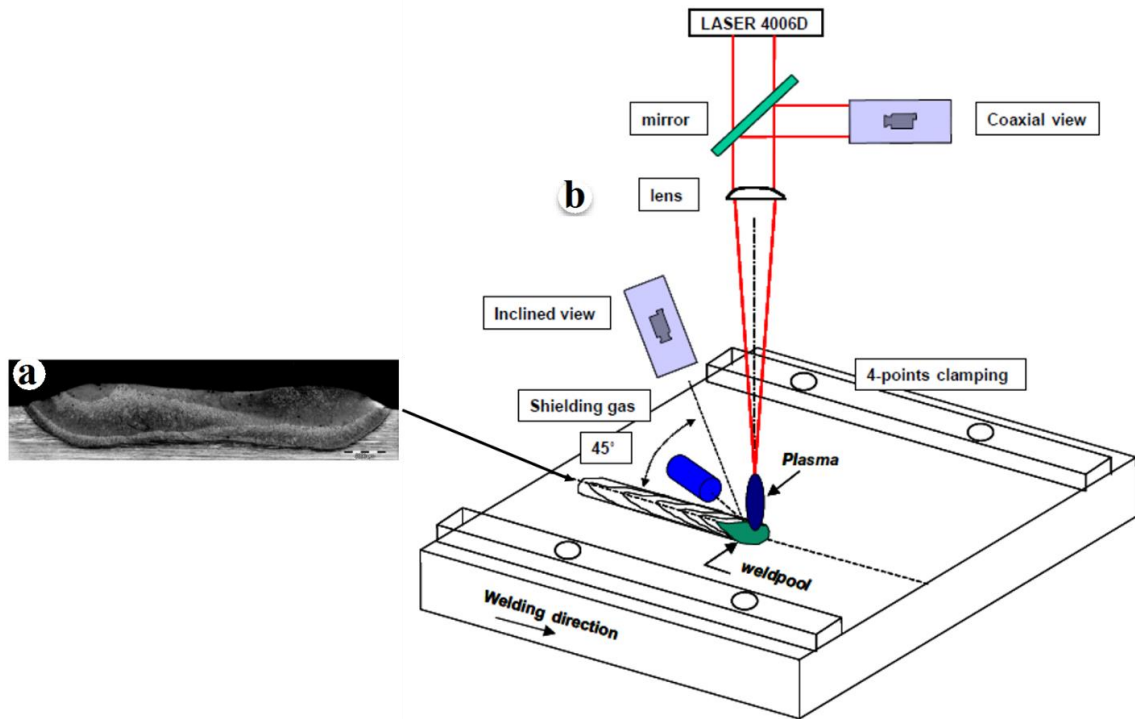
(a) As-deposited Al 7075, and (b) Experimental setup of laser cladding process [18, 24].
